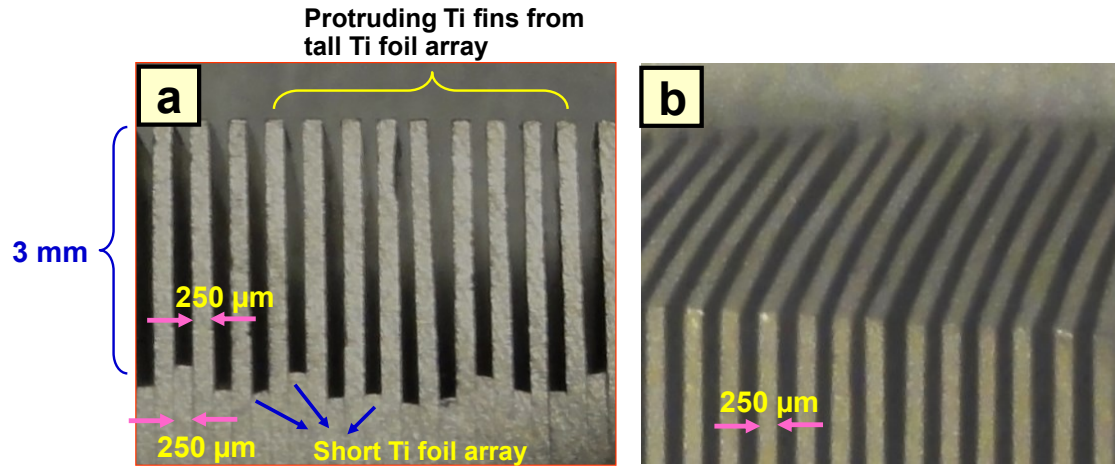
Photographs of a three-dimensional Ti layer assembly consisting of parallel thin foils and protruding fin array. High density, 8 nm diameter TiO₂ nanotubes are added onto each of the Ti layer surfaces. (a) cross-sectional view, (b) oblique incident view. The spot welded region is located below the photographed regions in the figure and is not shown.
